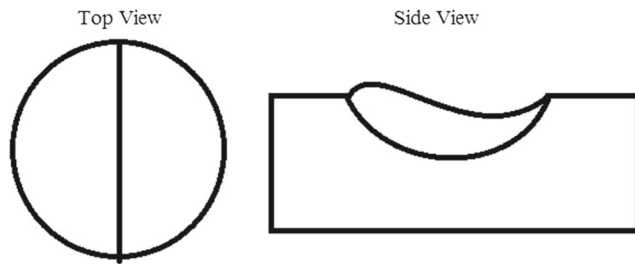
Weld pool oscillation (for half penetration) under mode 2
